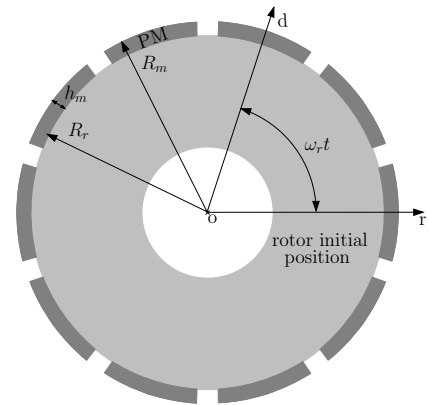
Layout of the rotor of a 12 slots/10 poles surface mounted PM machine
